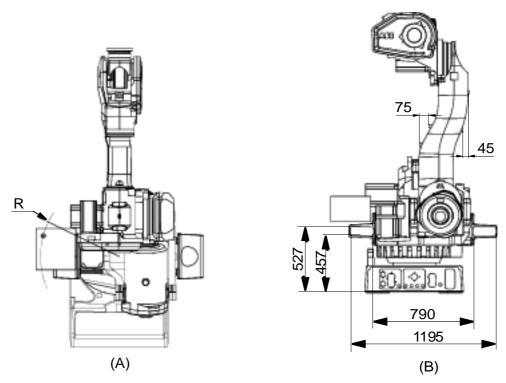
Extra load on the frame of IRB 6600 (dimensions in mm).
